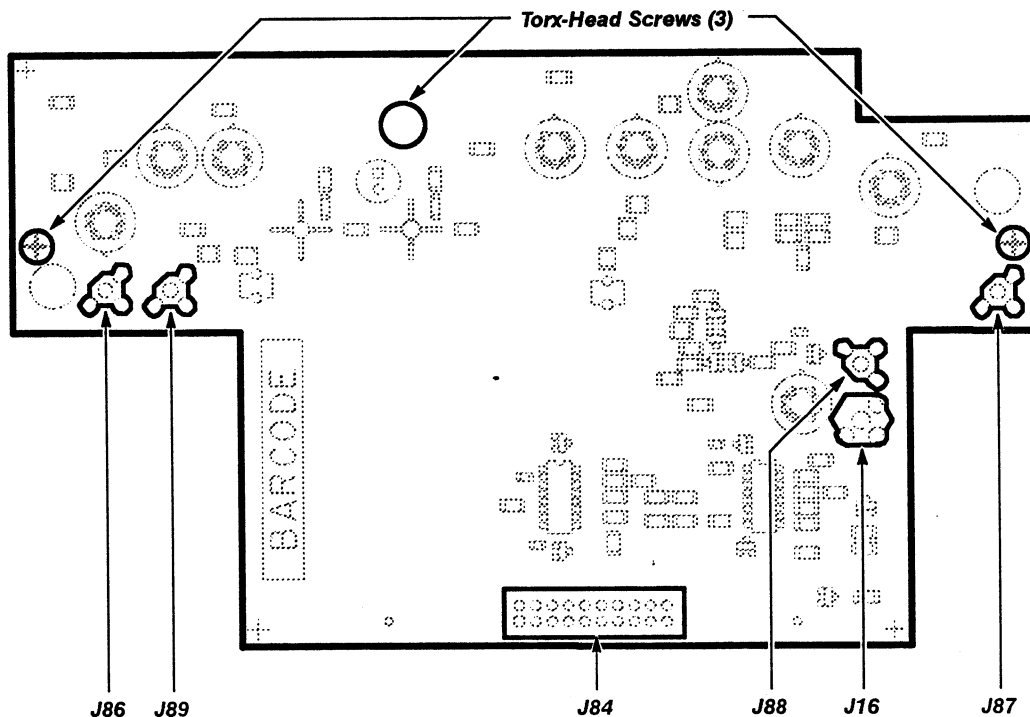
Removing and Replacing the A32 Trigger Select Board
